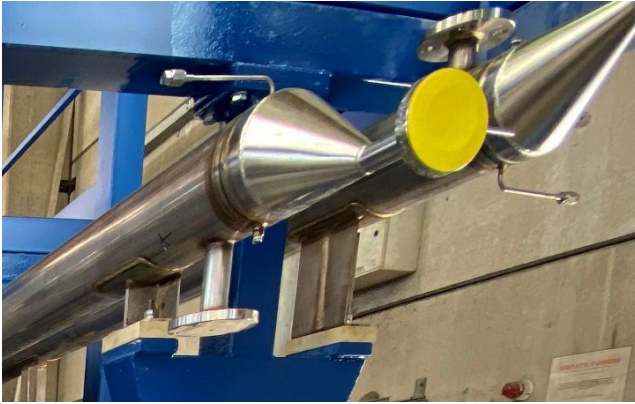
Plastic cap to be used for protecting the opened flange after the removal of the blind flange
